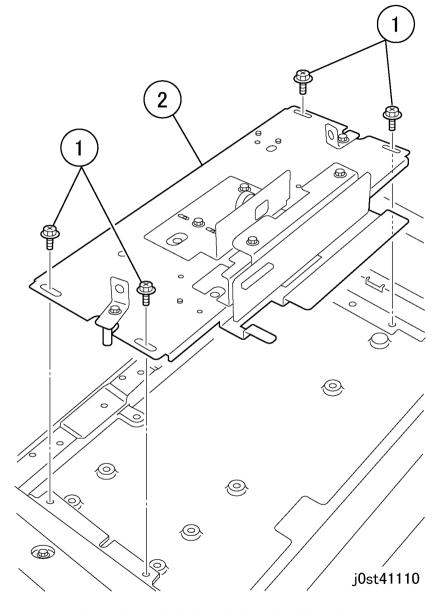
Removing the Lens Kit Assembly (j0st41110)
